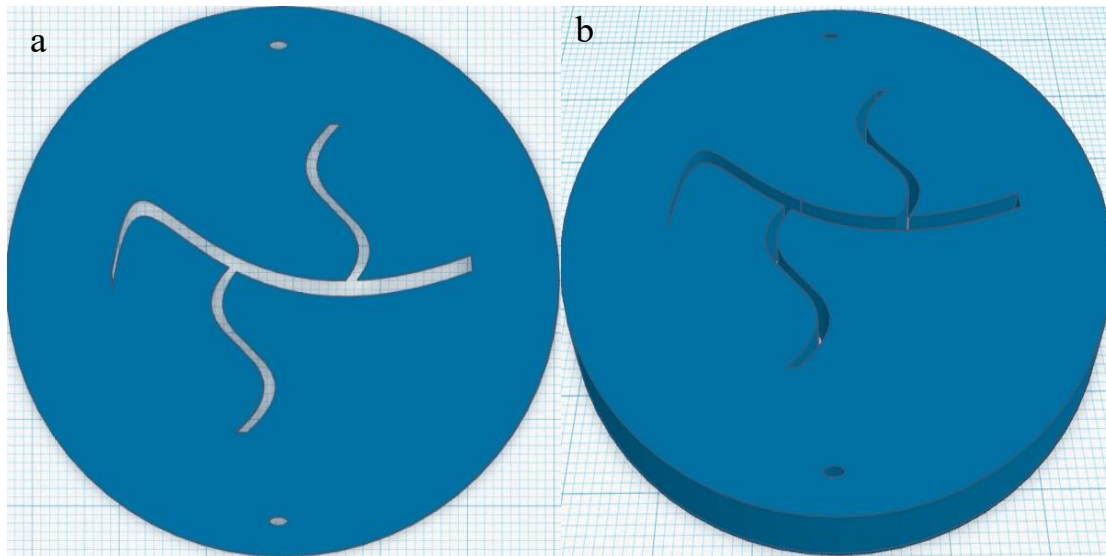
(a) 2D and (b) 3D view of the printed disc with complex fracture design.
